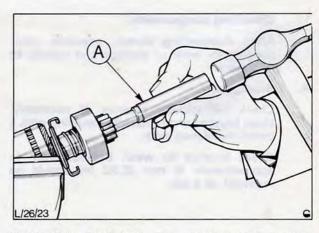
Slide thrust collar down armature shaft using a suitably dimensioned tube, 'A'
